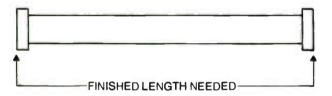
Measure for the required finished length from flange face to flange face.
